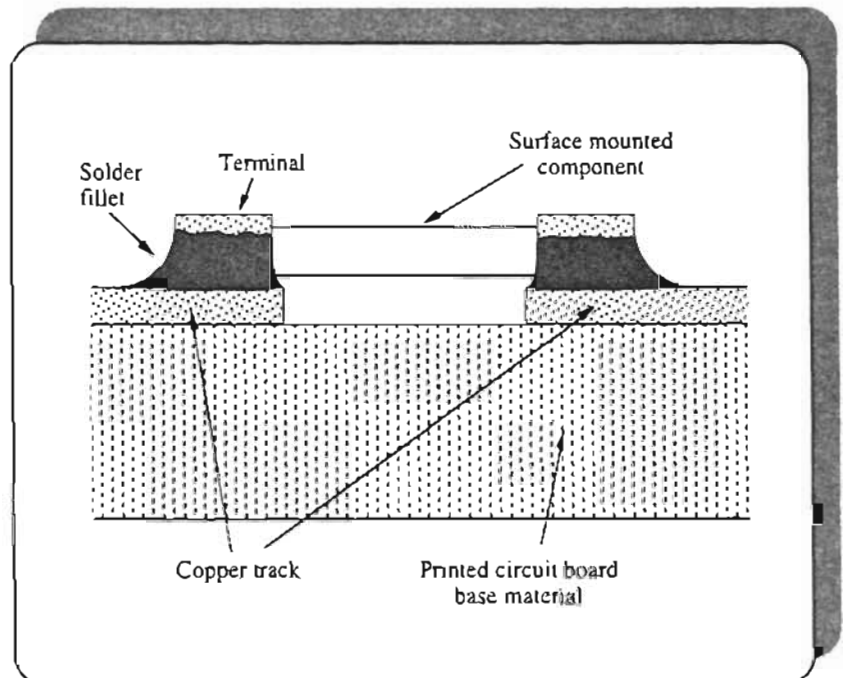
Soldered joints formed between component terminals and copper track on a surface mount assembly printed circuit board
